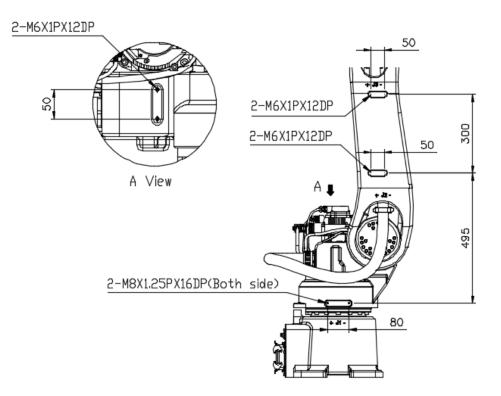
Mounting surfaces on the robot arm (RA620-1739 and RA620-1621)
